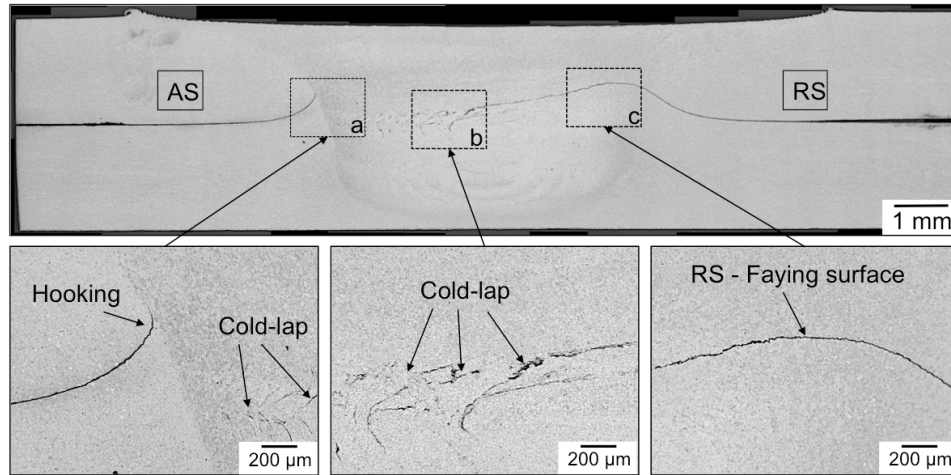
Cross-section of a friction stir linear weld in lap configuration where AS is the advancing side and RS is the retreating side.
